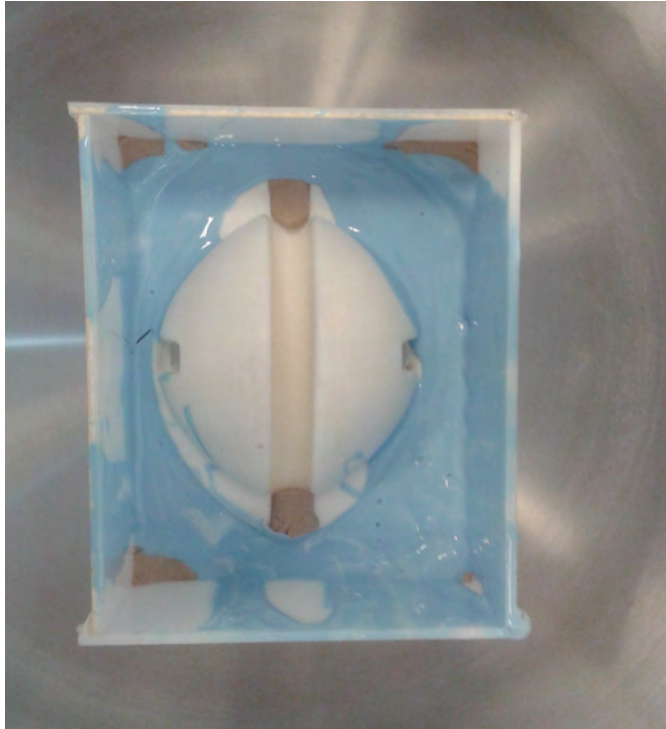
Preparation of the casting mold visible casting model in the molding box.
